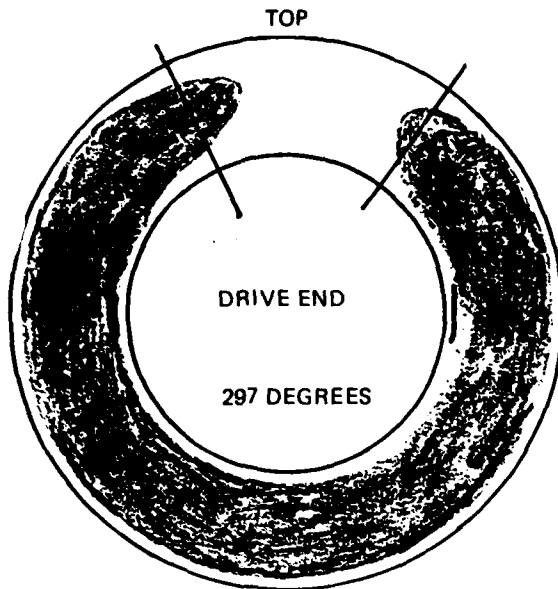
Load Zone Test on Slave Bearings With Initial Housing Design.
